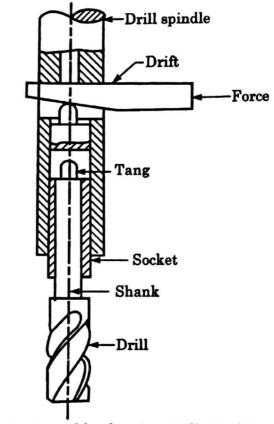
An Assembly Showing Drill, Socket and Drill Spindle With drift
